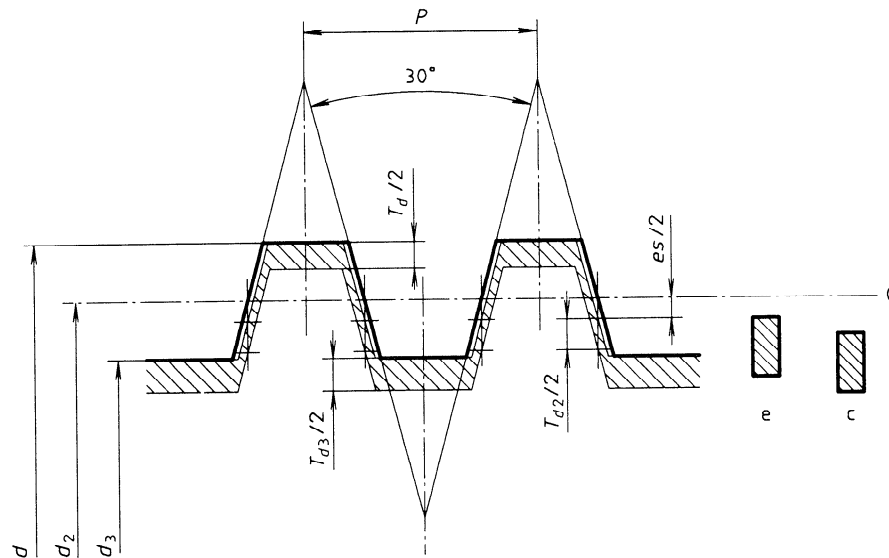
Bolt threads with tolerance positions c and e for the pitch diameter
